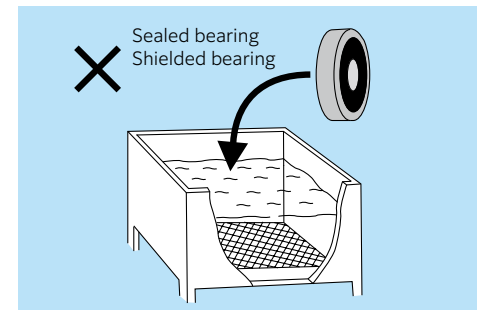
Heating grease filled bearings in oil bath prohibited
